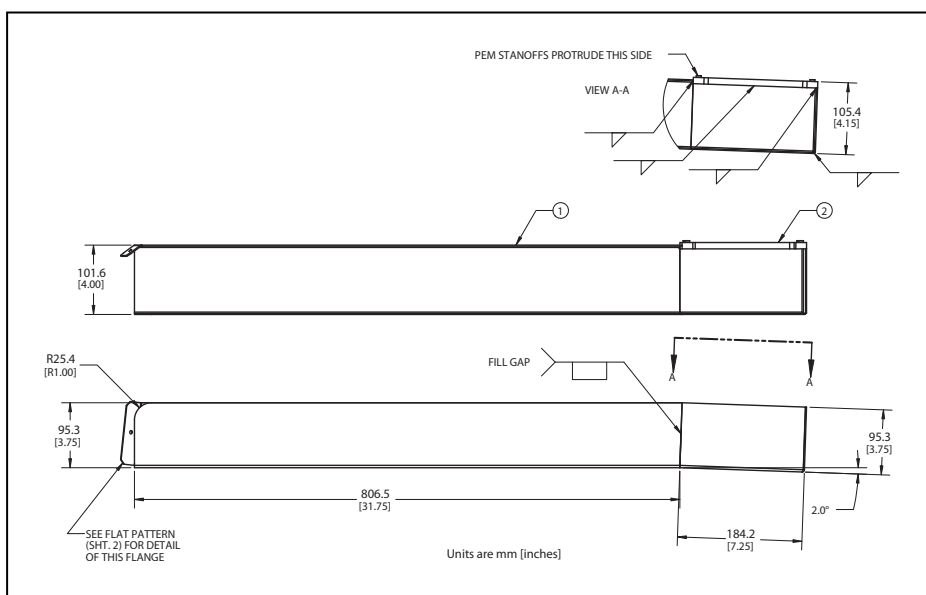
Sample Cable Tray, Dimension Drawing 1 (units are mm [inches])
